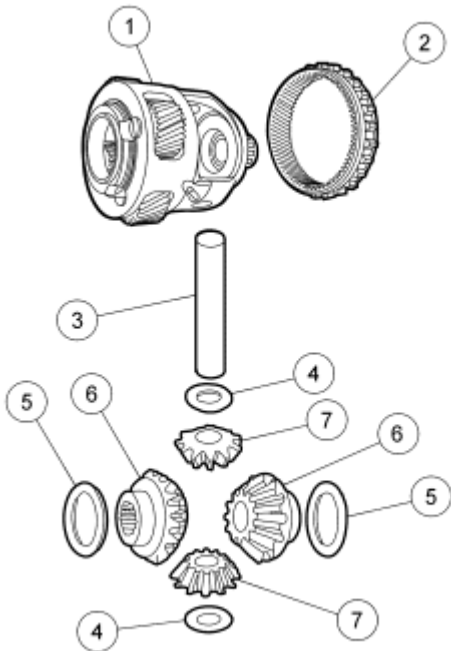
Exploded View Of Final Drive Carrier & Differential Assembly
